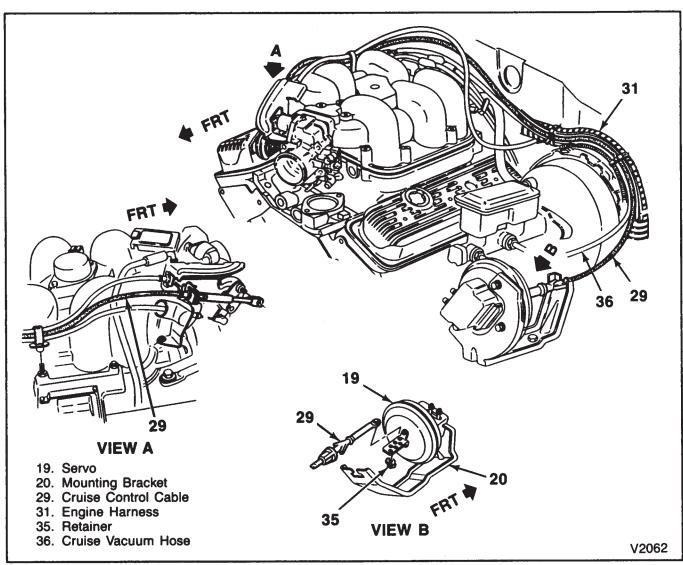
Servo Wiring Harness and Cable Routing—4.3L (VIN W) Engines
